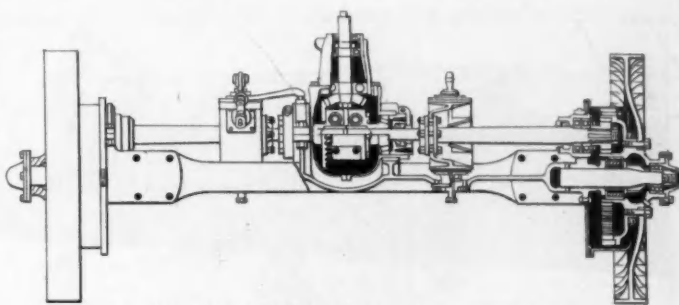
AN INTERNAL-GEAR AXLE HAVING SUPERPOSED AUXILIARY OR PINION SHAFTS
